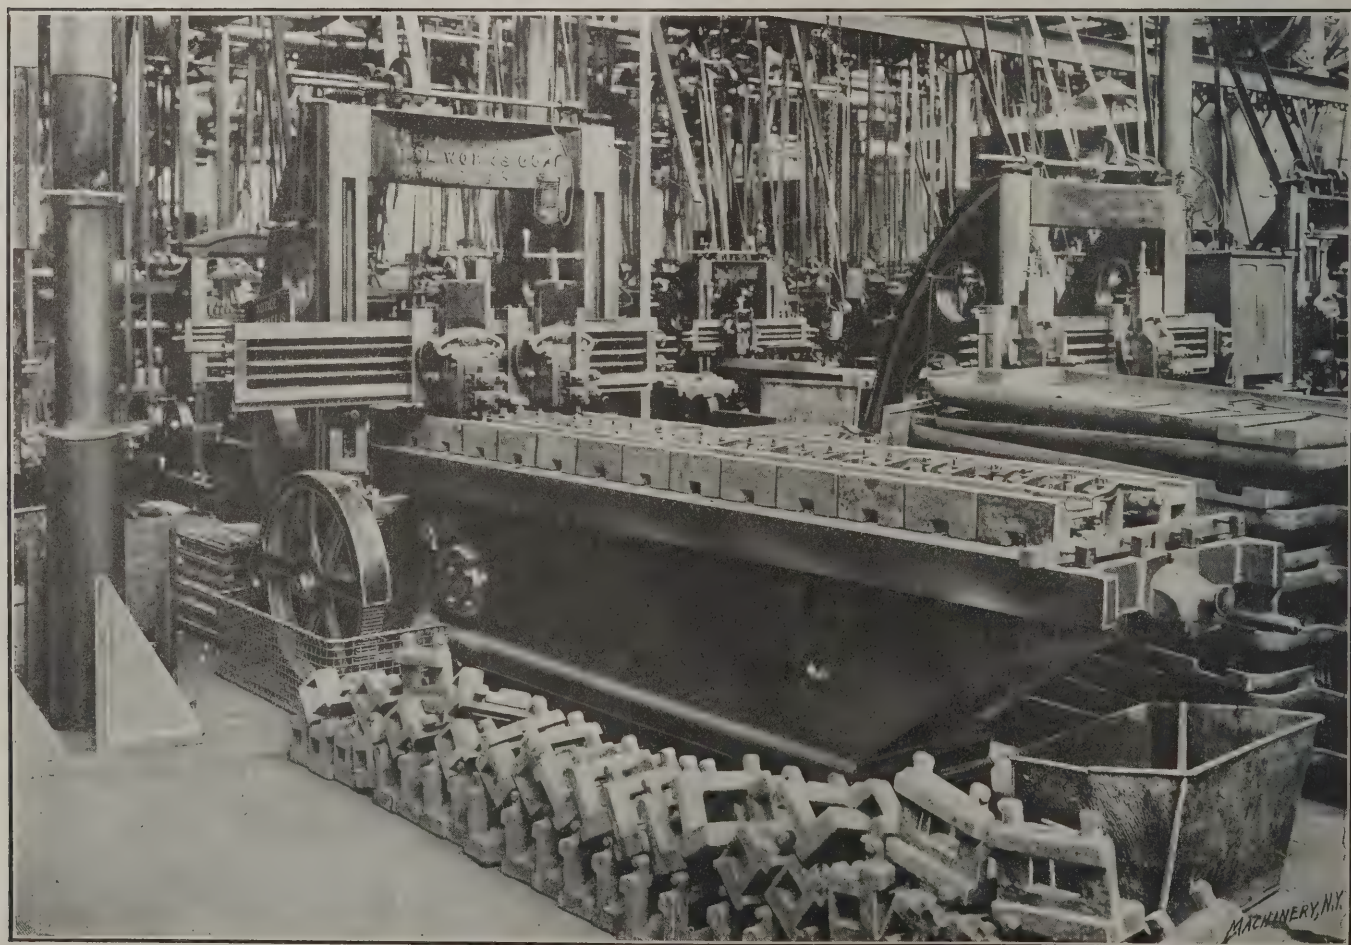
Planing Cutting Off Slides for Turret Lathes.
